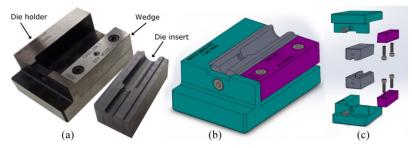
Modular die design, (a, b) bottom die assembly and (c) exploded top and bottom die assemblies.
